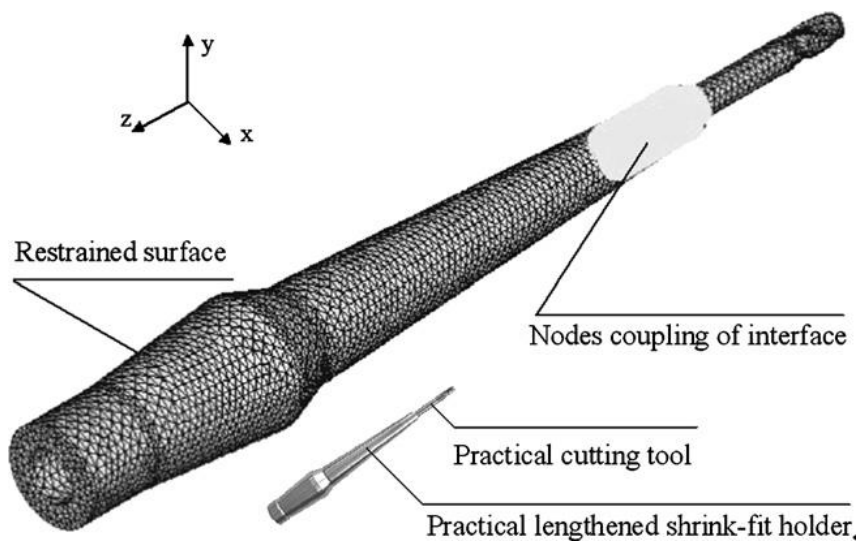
Modeling of shrink-fit holder and cutting tool for high-speed milling [7]
